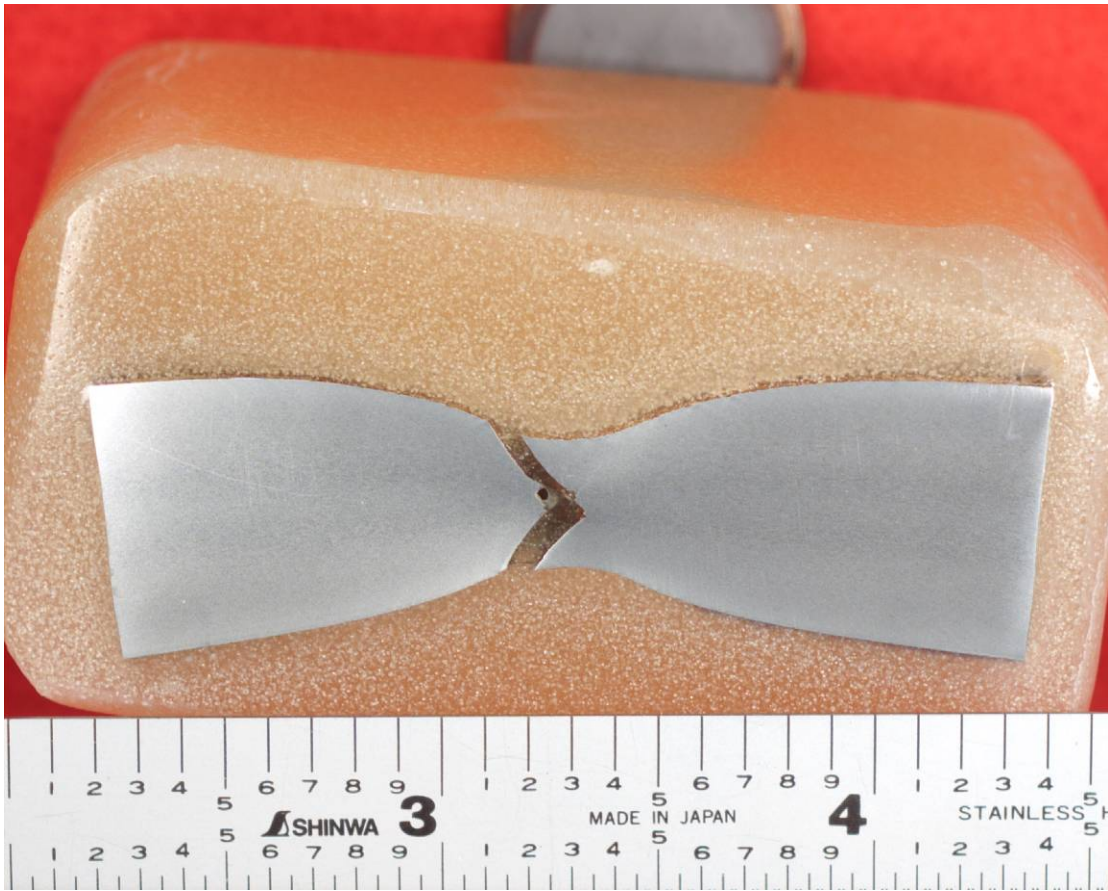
Cross-sectional view of Sample #1 after failure
